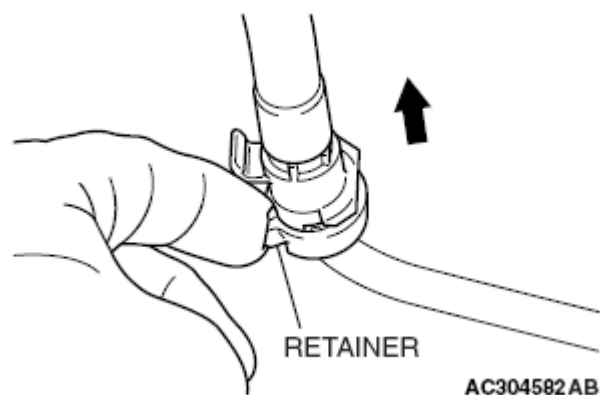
Removing Fuel High-Pressure Hose Retainer
